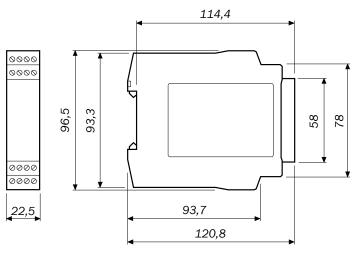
Dimensioned drawing for UE410-MU and UE410-GU (mm)
